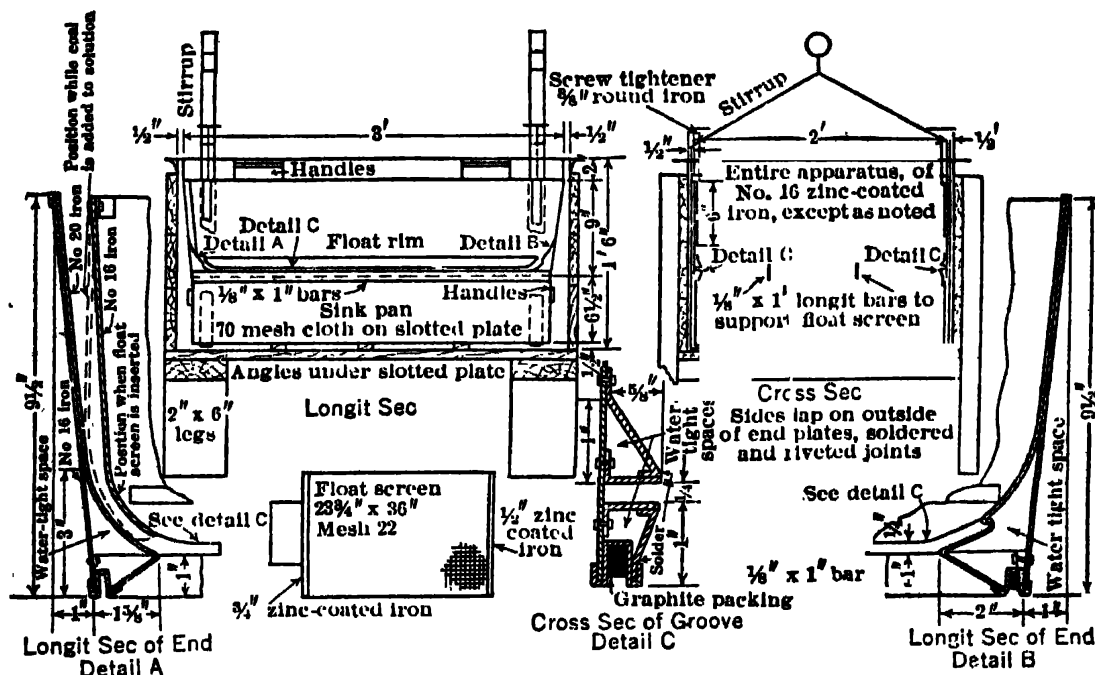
Details of Float-and-sink Testing Apparatus for Coarse Coal (5, 14)
